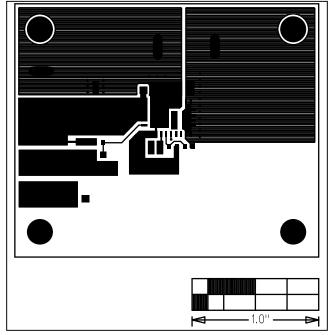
MAXM17516 EV Kit PCB Layout—Component Side
